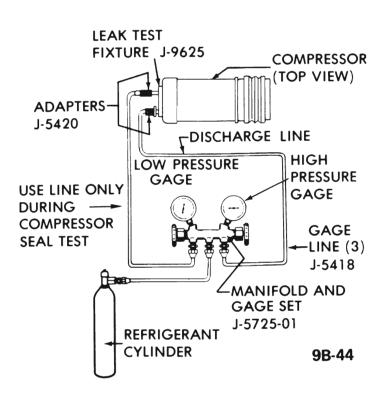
B-51 Leak Testing Shaft Seal and Seal Seat O Ring
